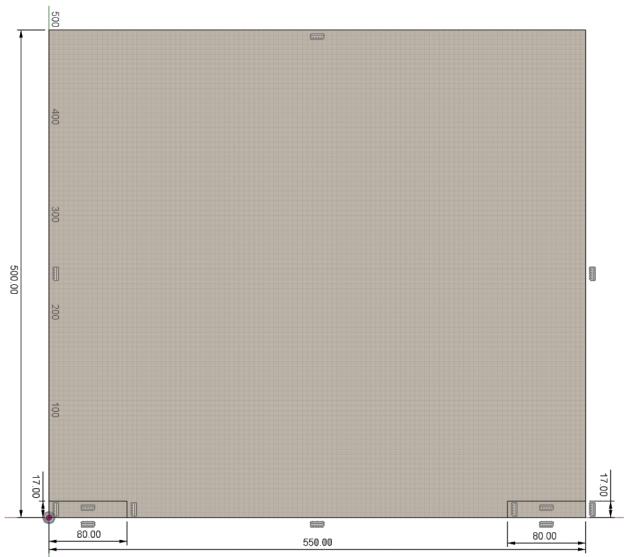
Component Alignment on Base Plate & Back Plate Size
